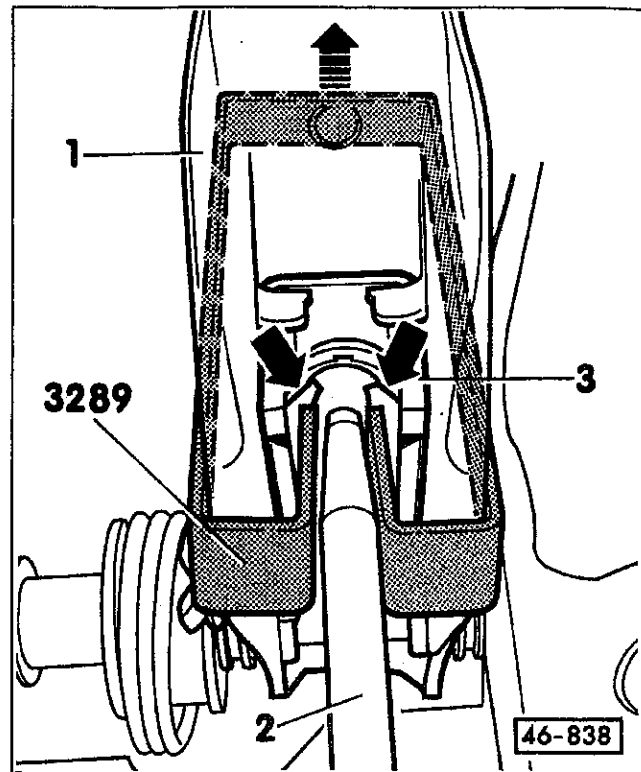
VW special tool no. 3289 being used to separate brake pedal (1) from brake booster pushrod (2). Ball retaining tabs shown at arrows.
